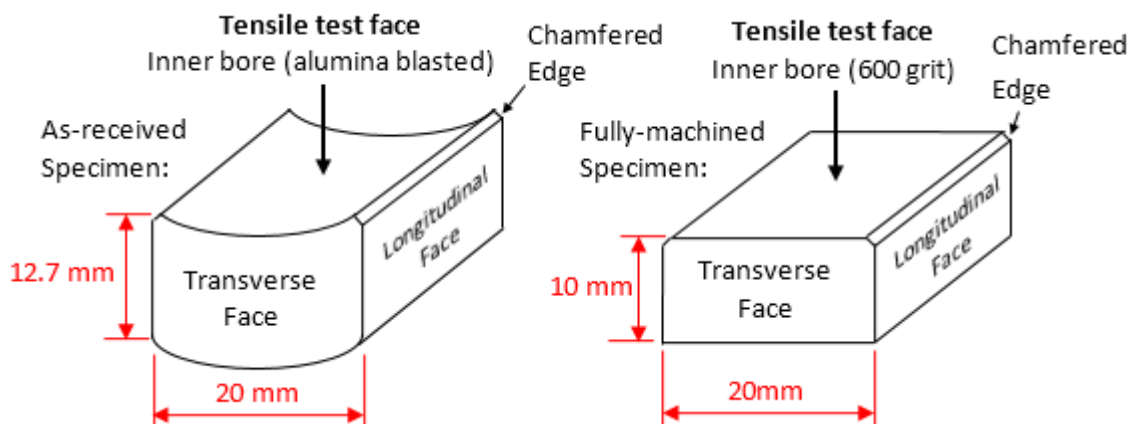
Cross-sectional geometry of as-received and fully-machined SSC test specimens
